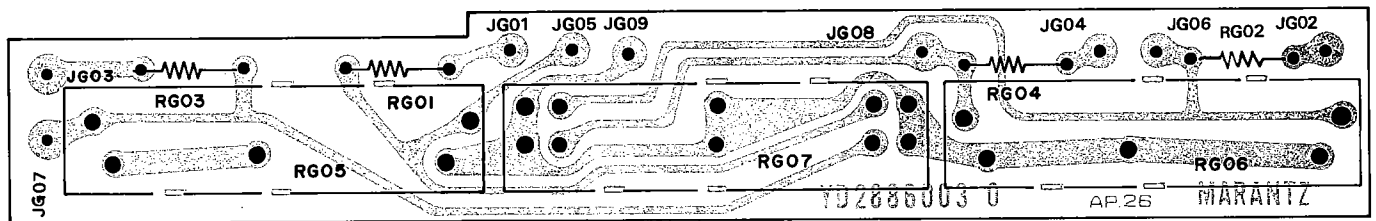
Balance Control Unit Assembly PG01 Component Locations
